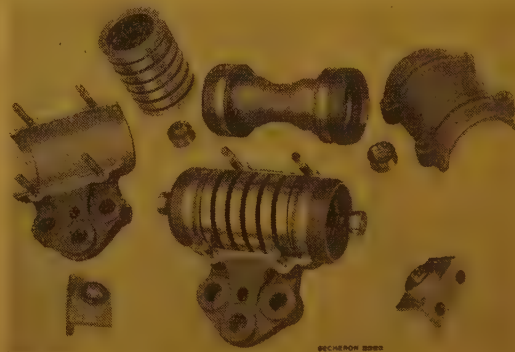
Same parts as fig. 120, but of more recent design. The assembly of the component parts can be seen; the central unit is here in one piece (screwed head).
